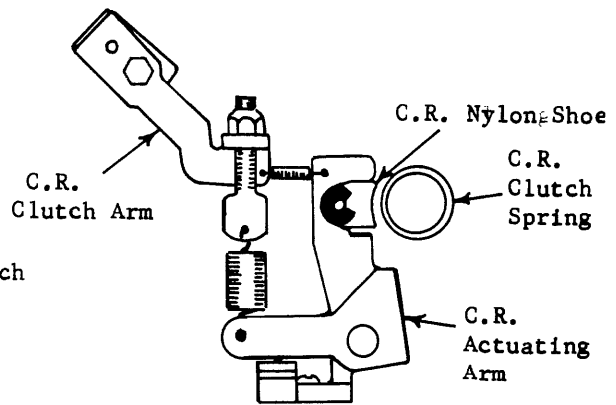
Carrier Return Clutch Actuating Mechanism
